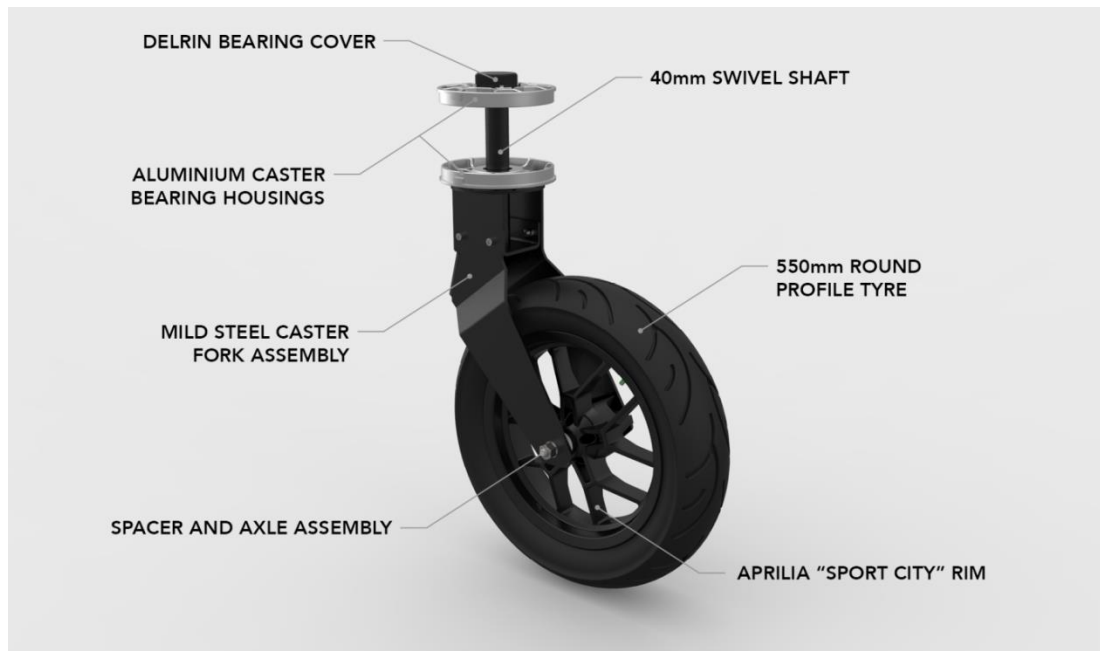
The complete caster wheel assembly is broken down into several minor sub-assemblies including the caster bearing housing, caster fork assembly, spacer and axle assembly and the wheel and tyre assembly.
